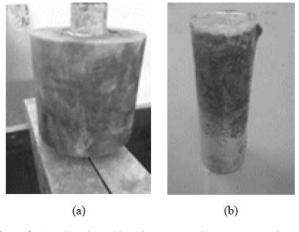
A tool steel mould used to squeeze the nanocomposites (a) and the ingot after squeezing (b)
